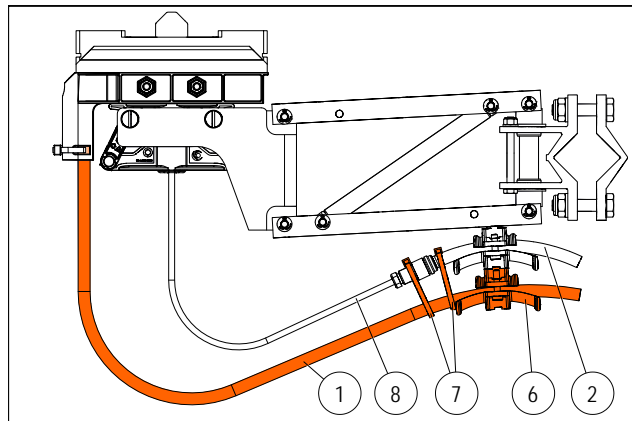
Fasten PE cable (1) in cable bracket (6)
